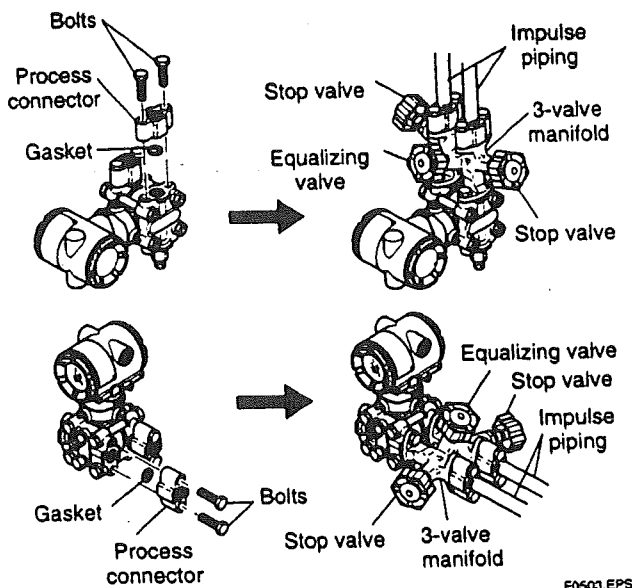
3-Valve Manifold (Direct-Mounting Type)
